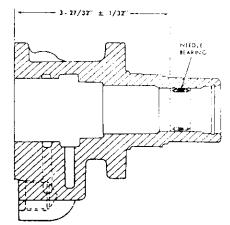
When renewing needle bearing in pump body, install same to dimension shown.
